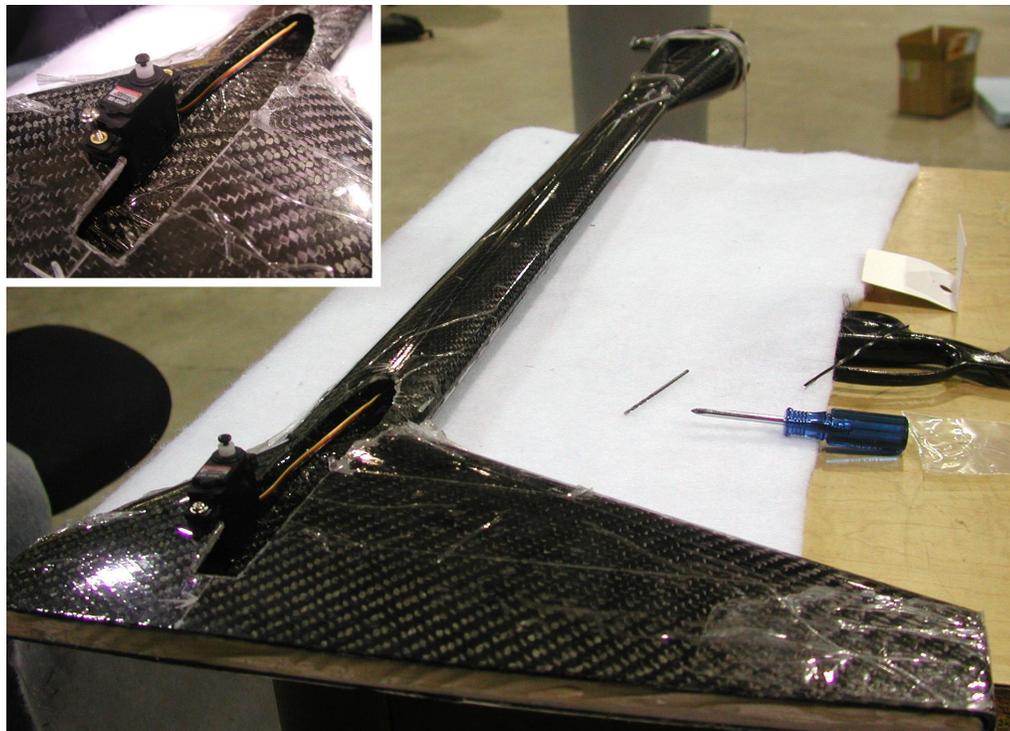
Rudder Servo Installation Complete – detail view top left.
